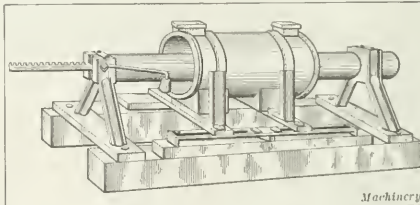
Wilkinson's Boring Machine which may be classed as the First "Modern" Type of Machine Tool
